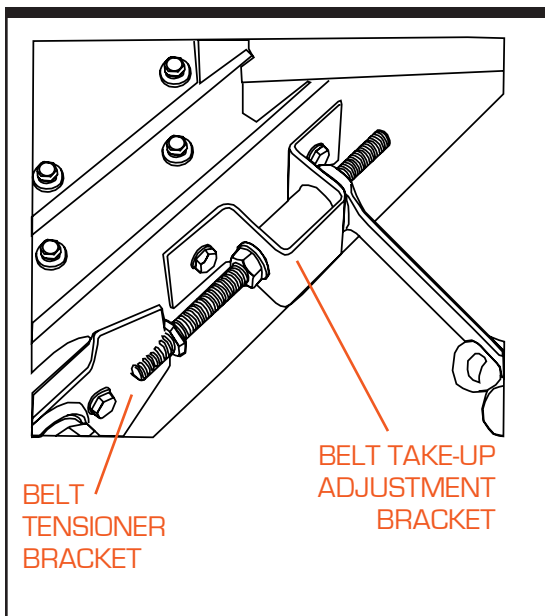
Tracking Adjustment of Belt Made to Belt Tensioner
